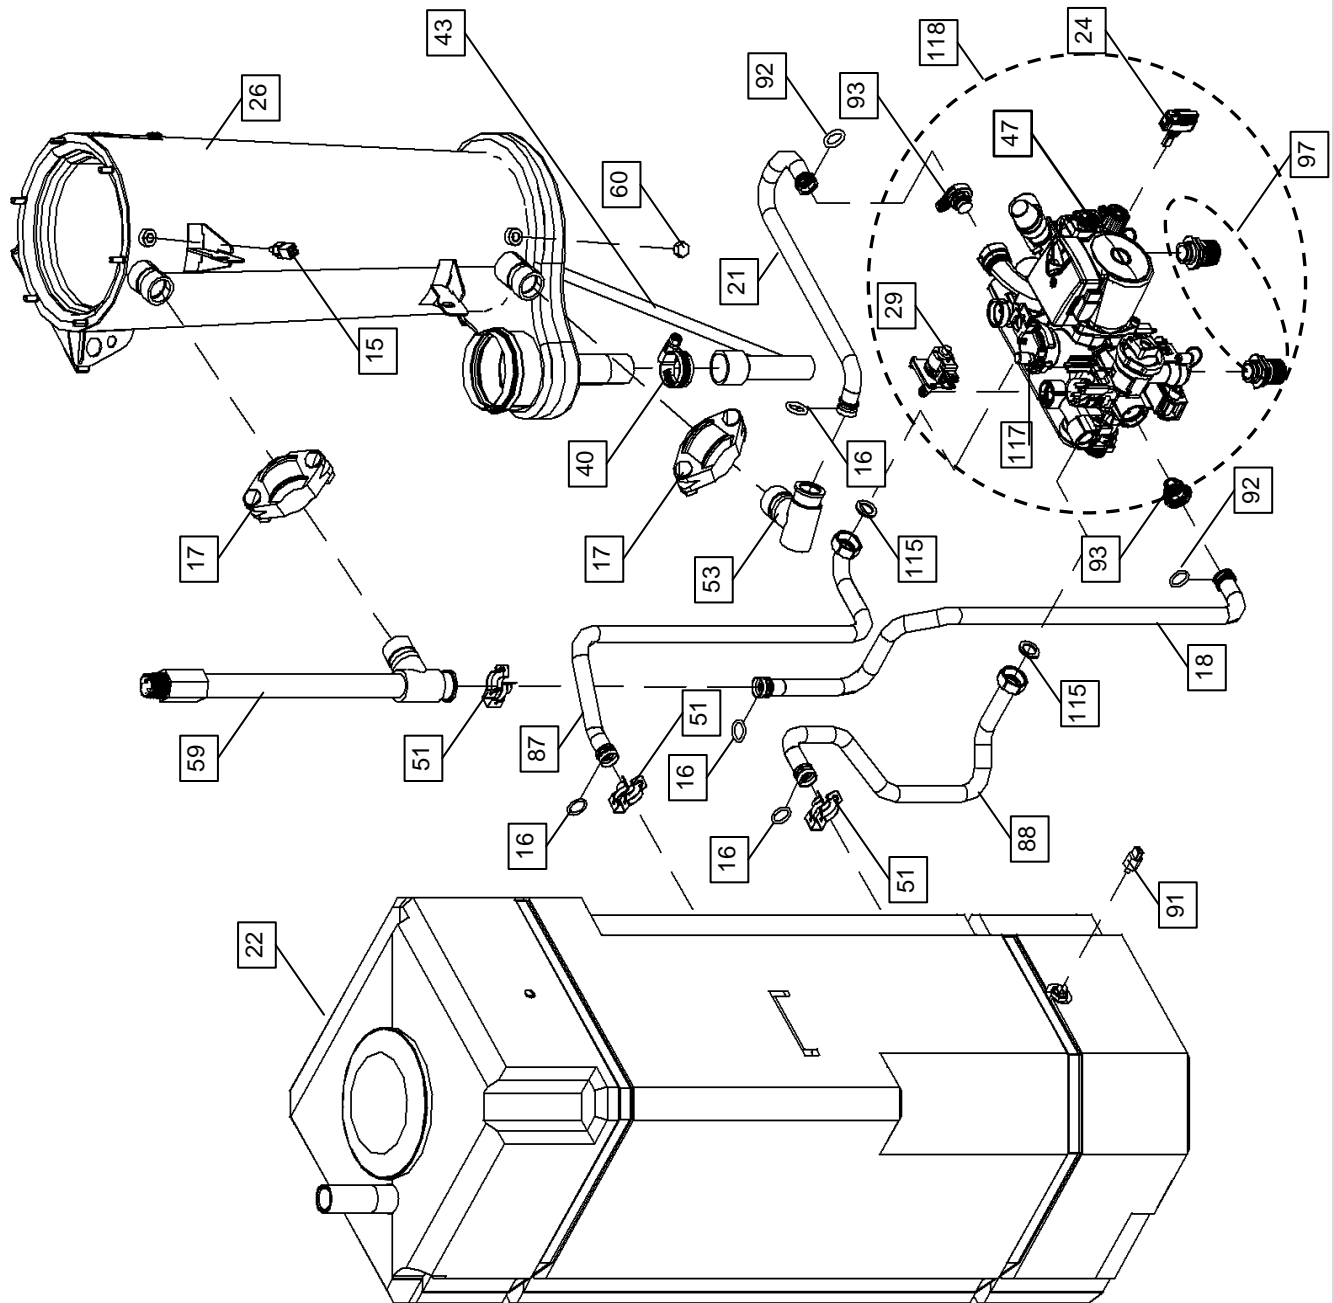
Heat Exchanger, Water Piping & Sensors (VM153)
